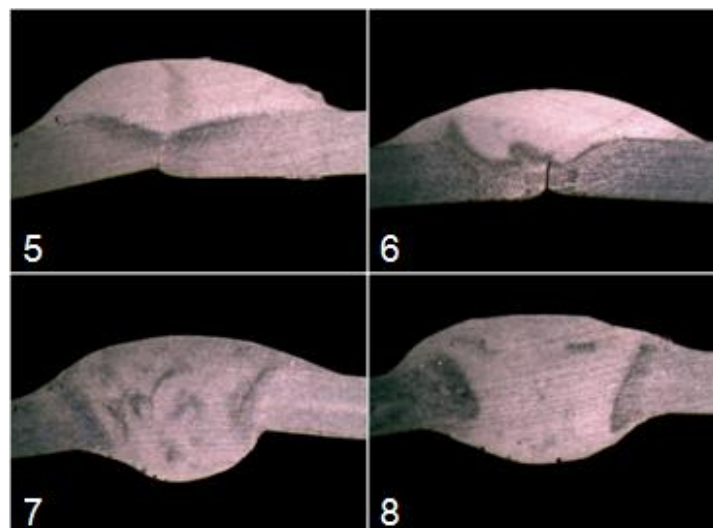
Cross section of welding samples with respective numbering by using filler ER4043
